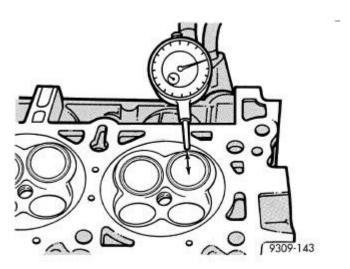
Intake & Exhaust Valves Courtesy of CHRYSLER LLC
